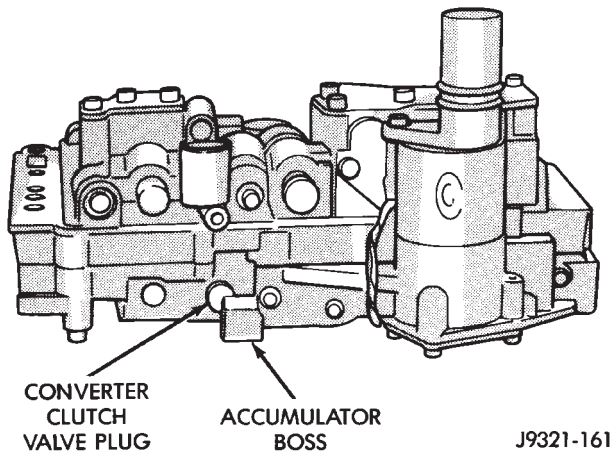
Seating 3-4 Accumulator On Lower Housing
